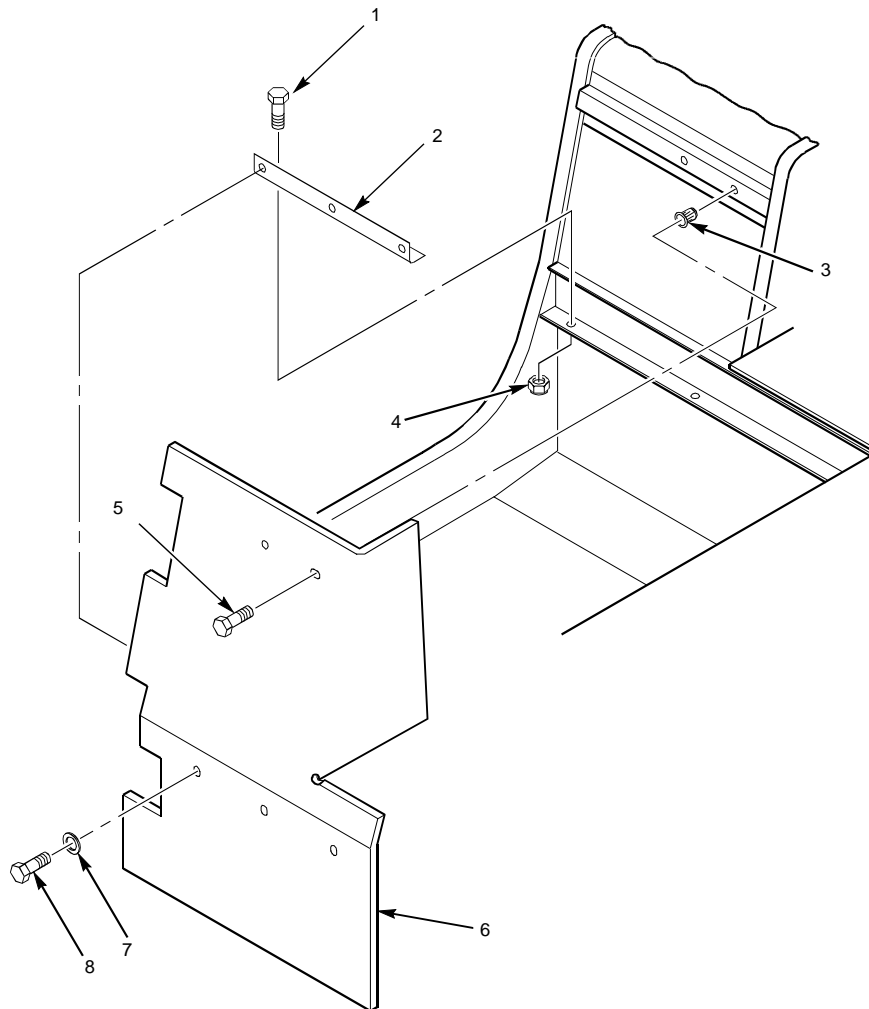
Rear Seat Backing Plates Removal (4 Door Only)
